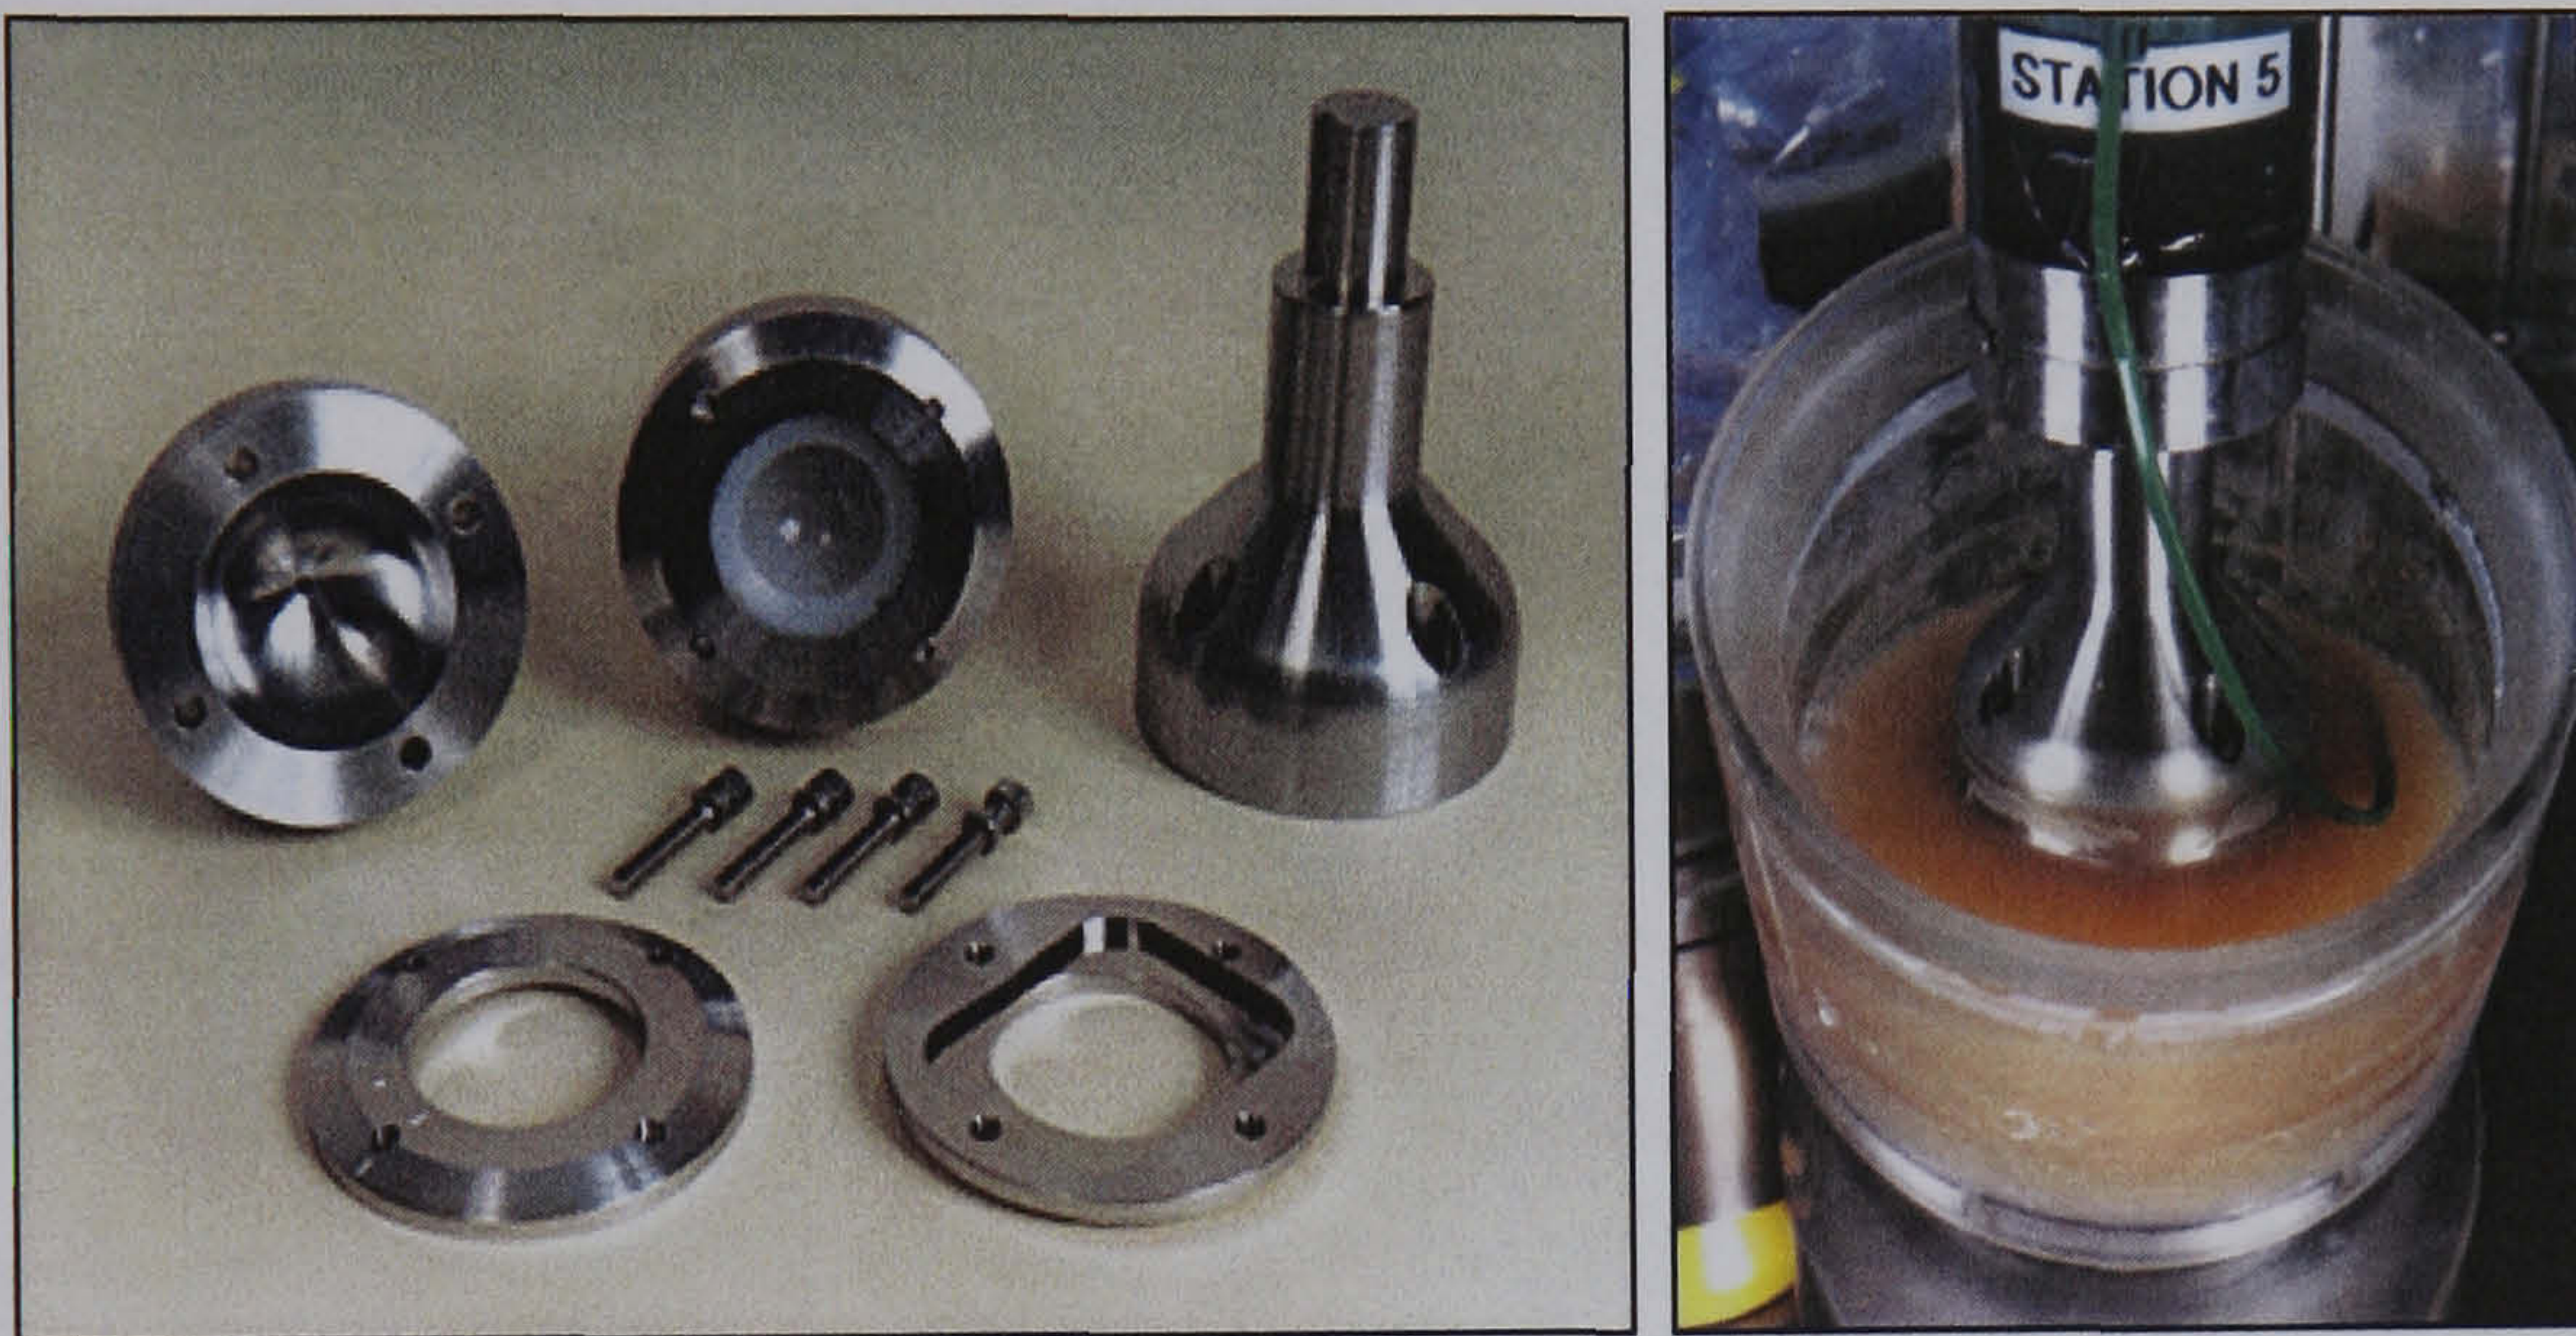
Image of the specimen fixtures used during testing of PE, and the assembly of the specimen fixtures within the test chamber with lubricant (Bowsher, 2000)
